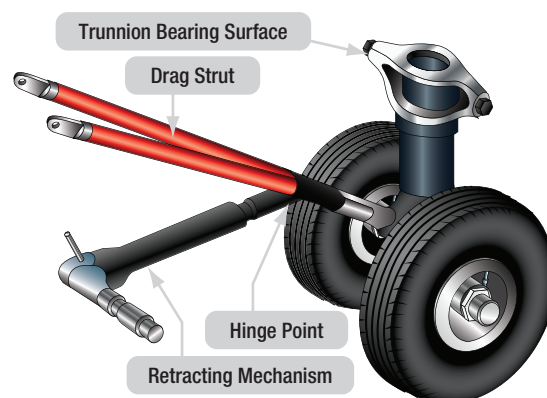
A hinged drag strut holds the trunnion and gear firm for landing and ground operation. It folds at the hinge to allow the gear to retract.
